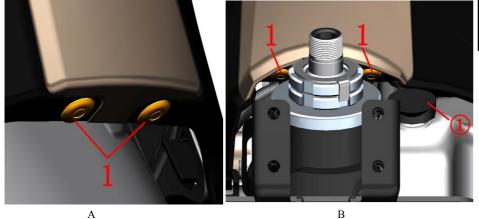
FUEL TANK COMPONENT		Fuel tank middle cover component	CHK ADJ
